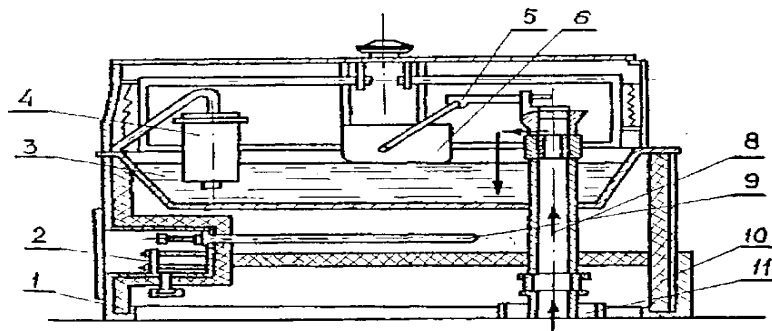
box; 2 - relay; 3 - dishes; 4 - thermostat; 5 - valve mechanism; 6 - float; 7 - lid;
